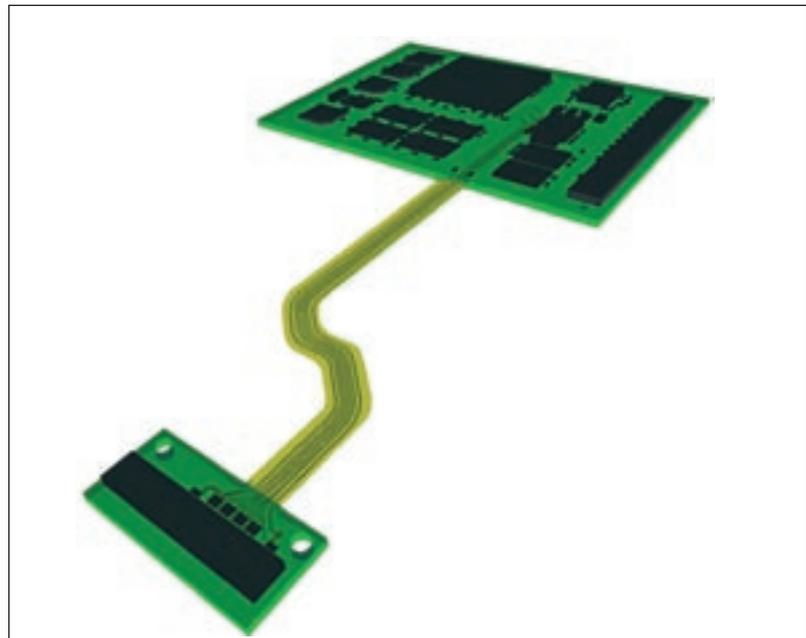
Viewing the rigid-flex layout database in a 3D Viewer. Here the board designer can verify the flex layout either as a flattened view (shown) or folded into its assembled state along with the mechanical enclosure
